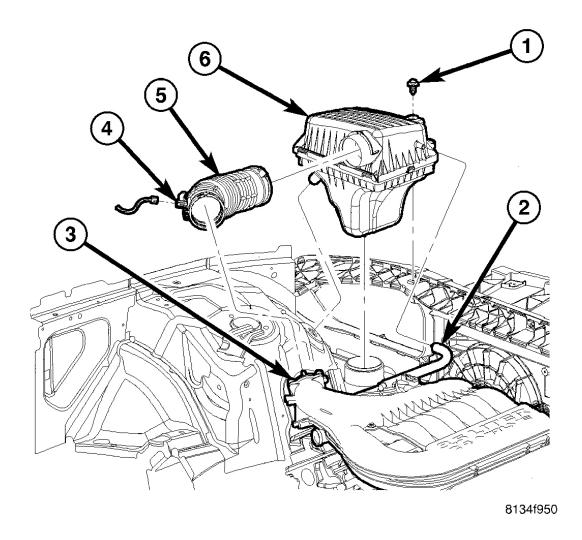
Air Cleaner Housing Assembly Courtesy of CHRYSLER LLC
